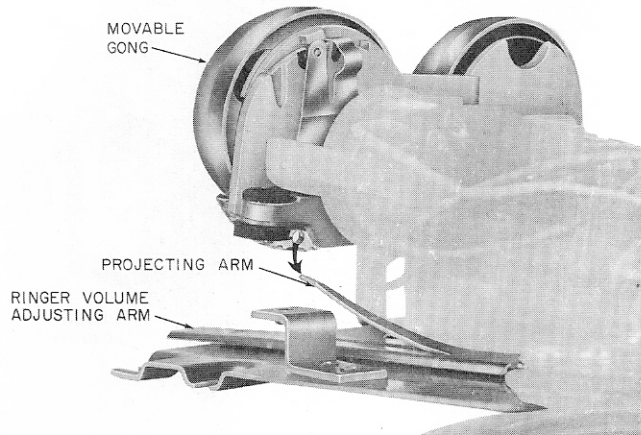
Assembly of C4A Ringer in 688-Type Subscriber Set, Side View
